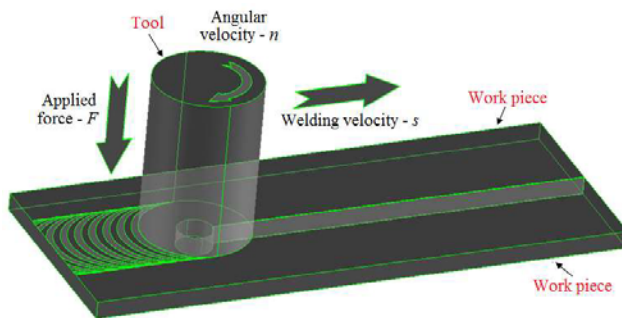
A schematic presentation of the friction stir butt welding process
